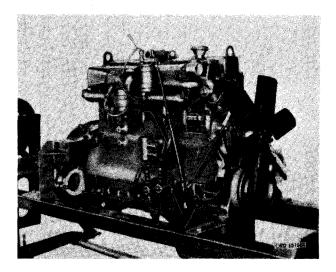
REMOVING OR INSTALLING AIR COMPRESSOR SUPPORT GASKET.
